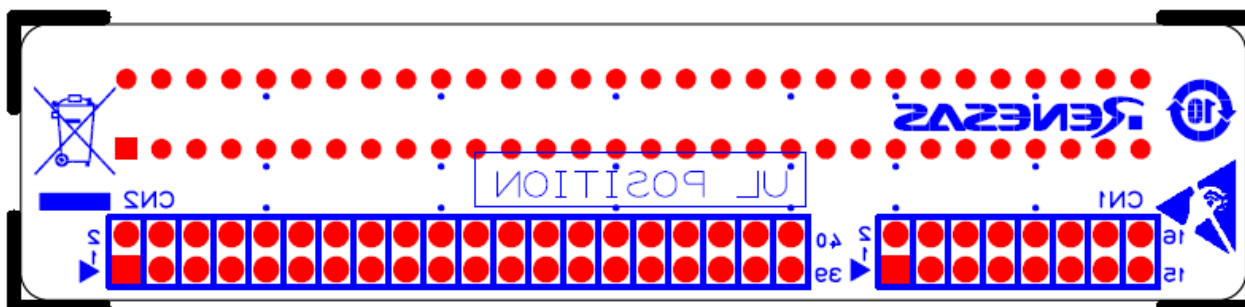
CPU-Electrode relay board: Solder Side Silkscreen
